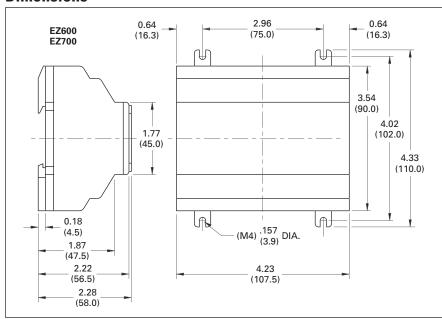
EZ600 and EZ700 Series Dimensions in Inches (mm), Drawing Number MD05013002E
